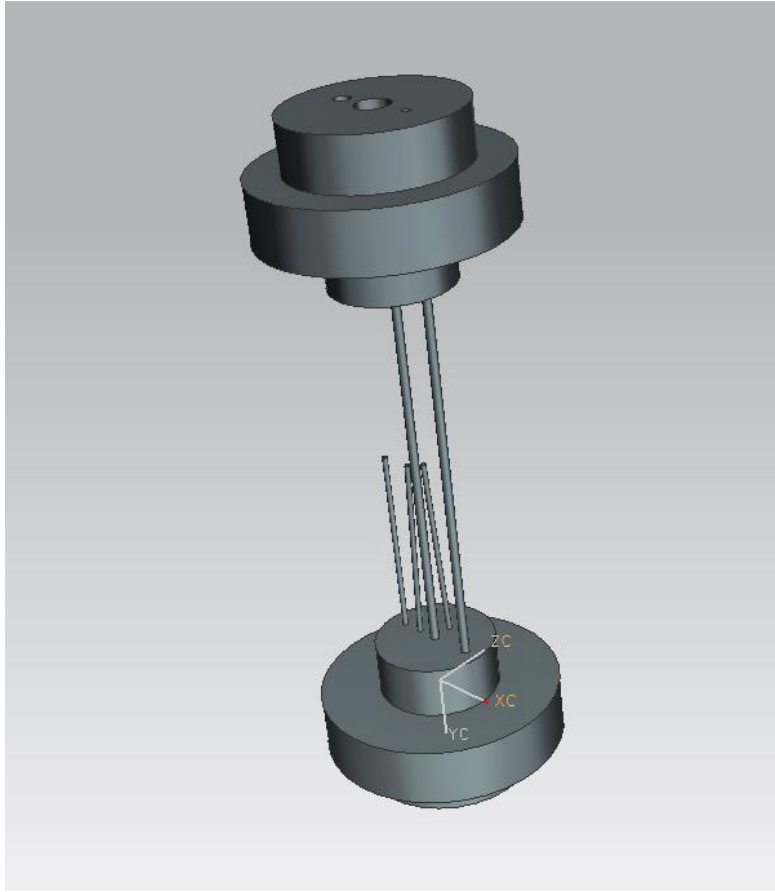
b) Isometric view of the assembly of crucible container with alumina tubes for the thermocouples
